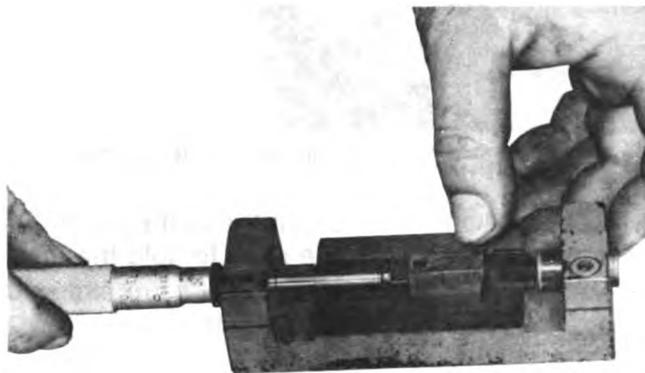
(V10182). Adjust The Cutting Tool.
